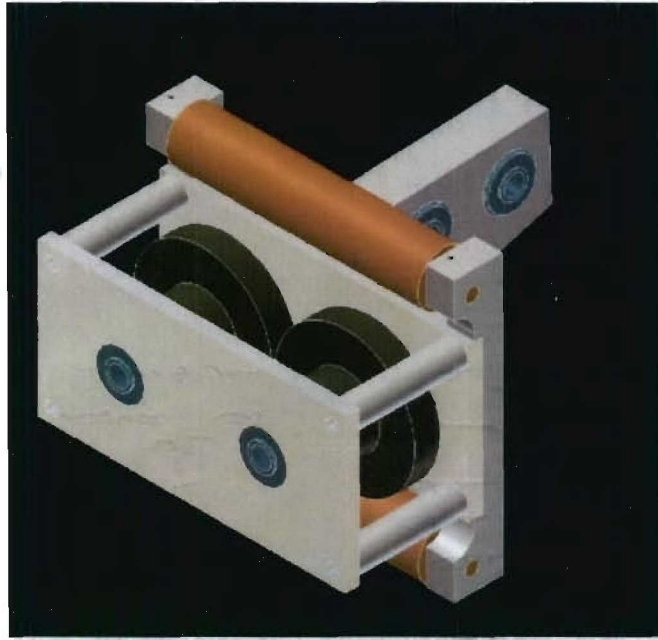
Isometric view of the bottom part of the sway sensor.
